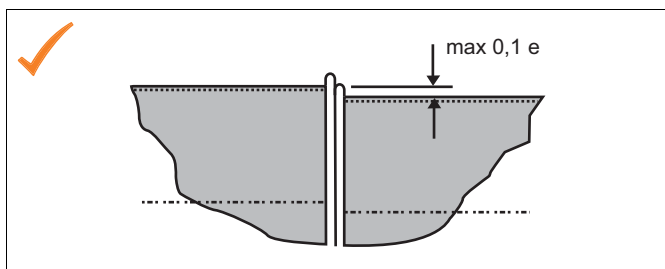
Butt-weld with mis-alignment of pipe (acceptable)
